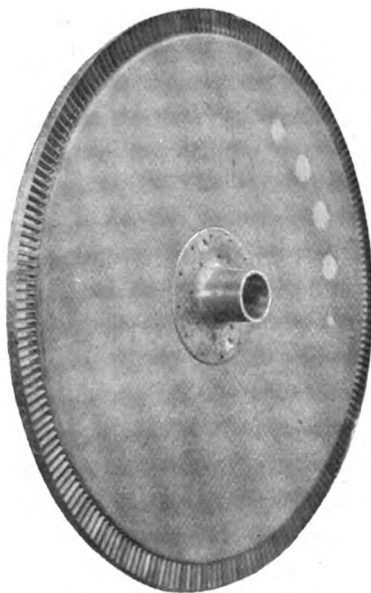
Rotating Wheel of a Rateau Turbine.
